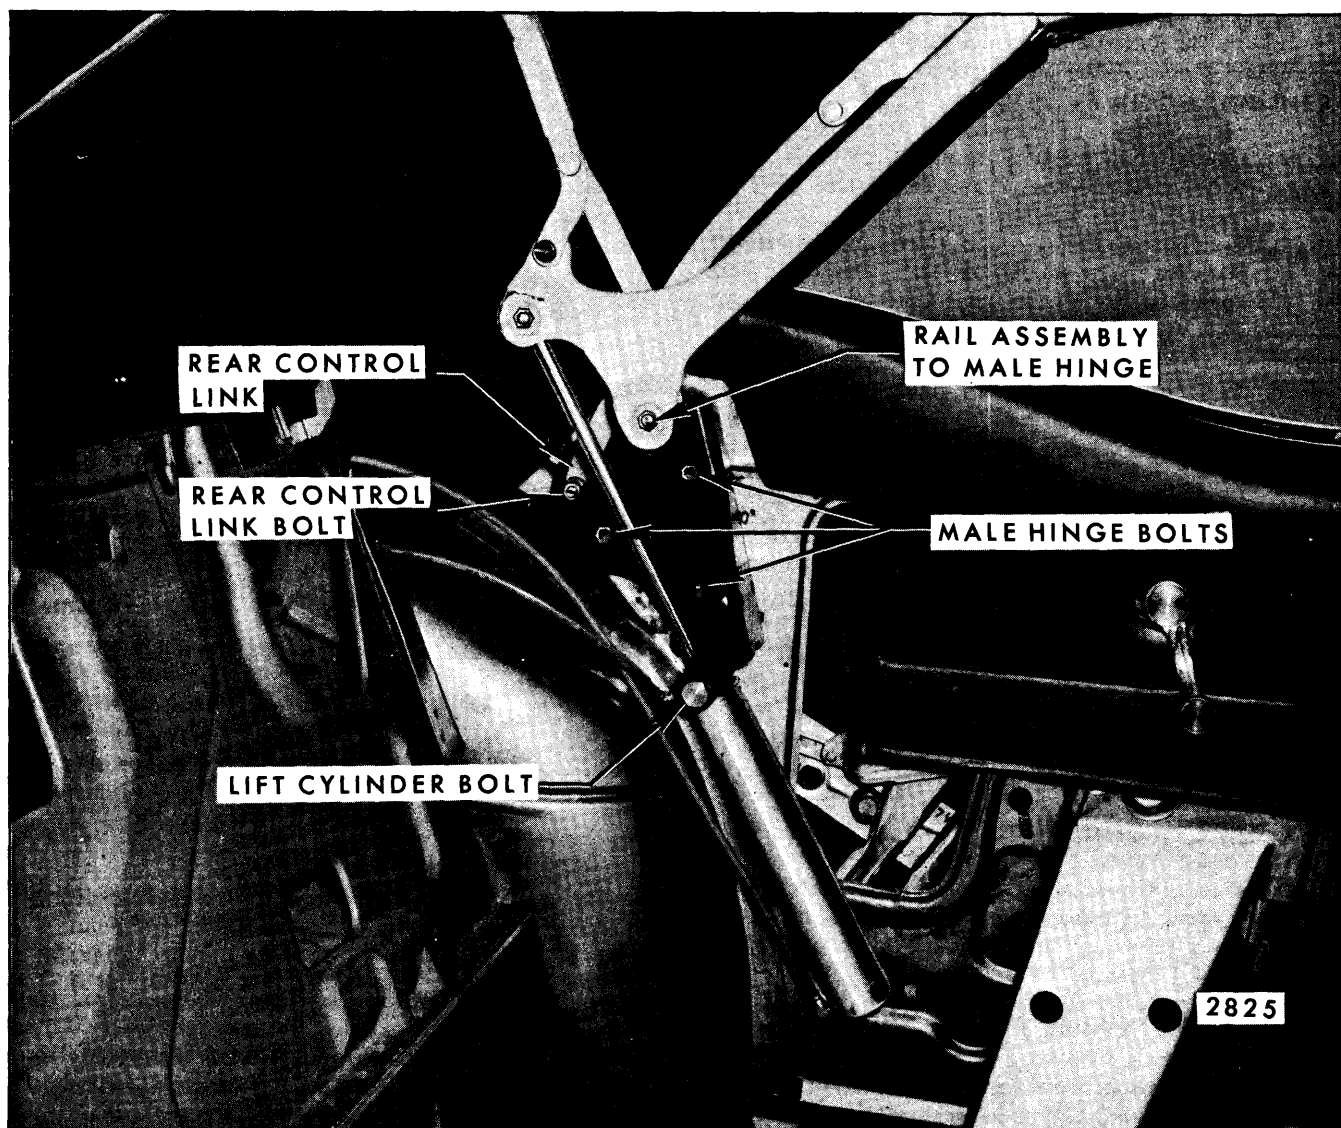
Folding Top Linkage Attachment - "A" Styles Shown, "B & C" Typical
